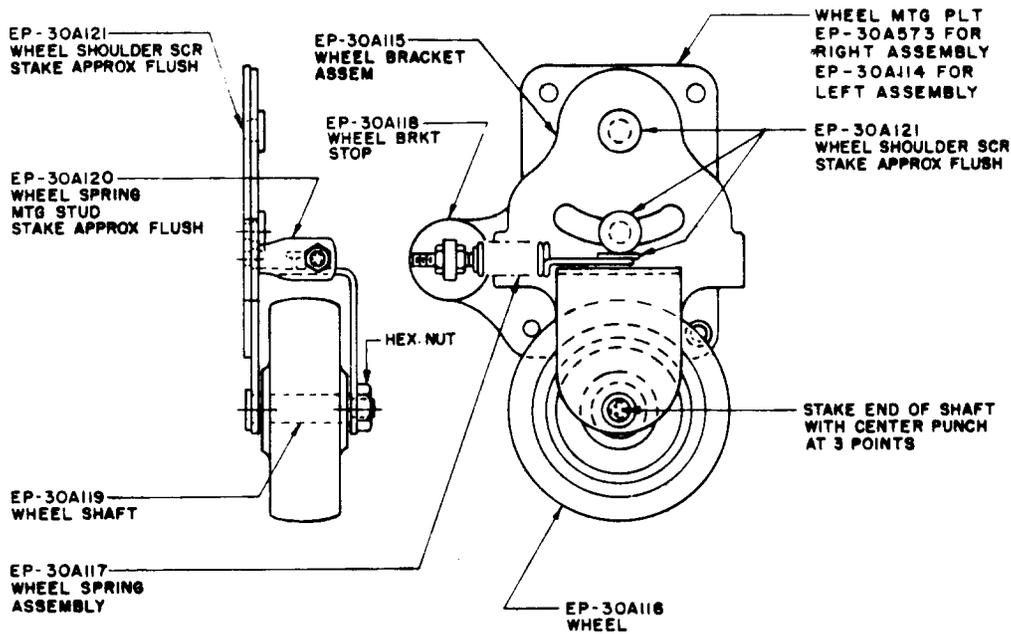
Platform and Portable-Type Rolling Ladder Wheel Assemblies
